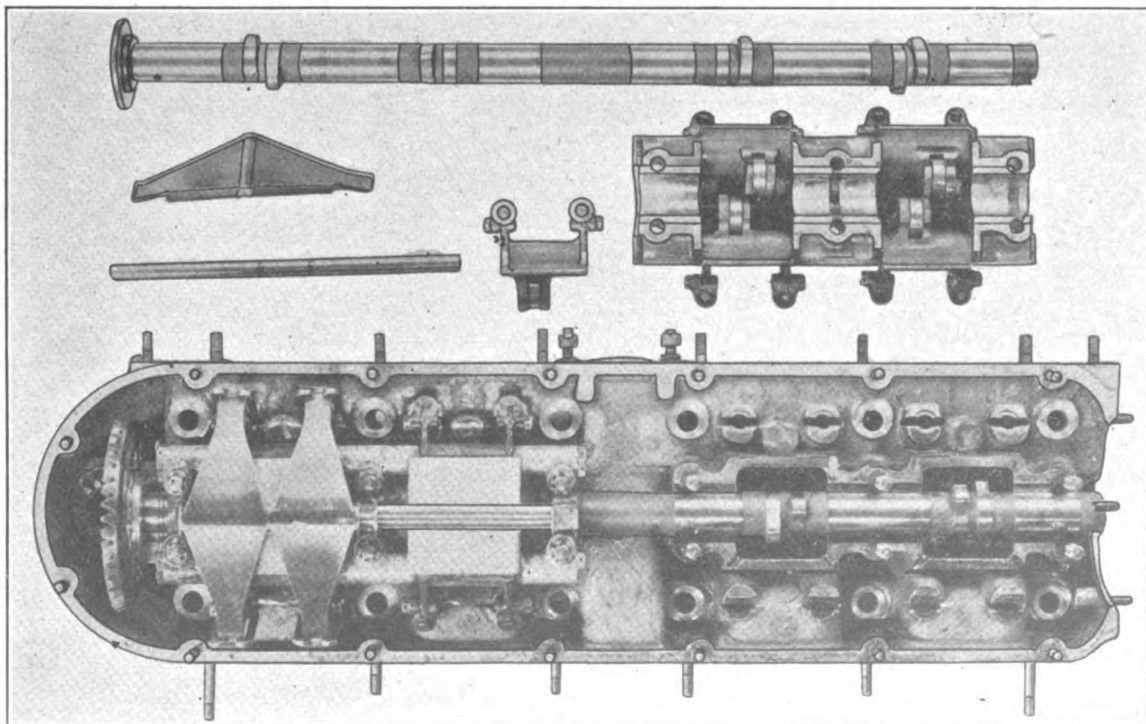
Cylinder head assembly with camshaft rockerarms and springs.
